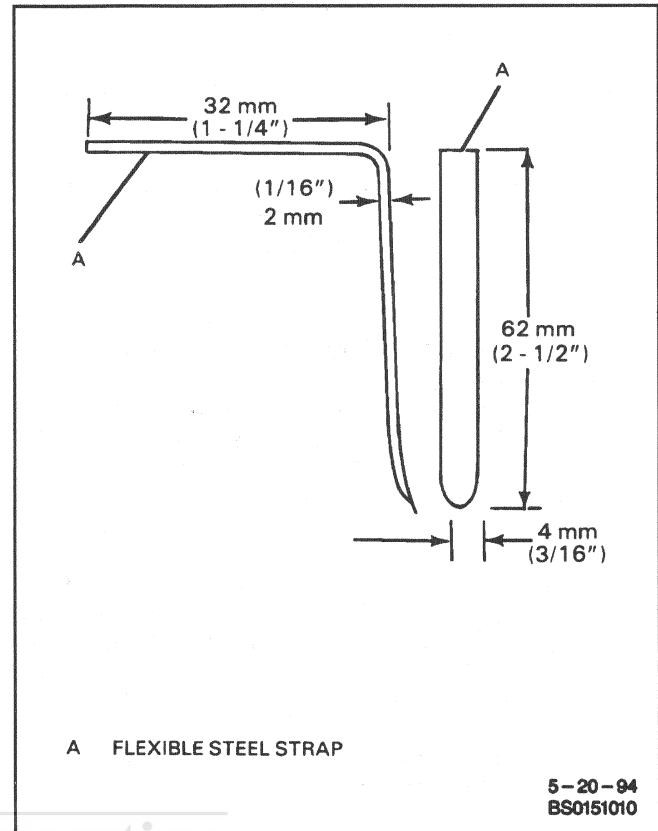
Head Restraint Lock Releasing Fabricated Tool
